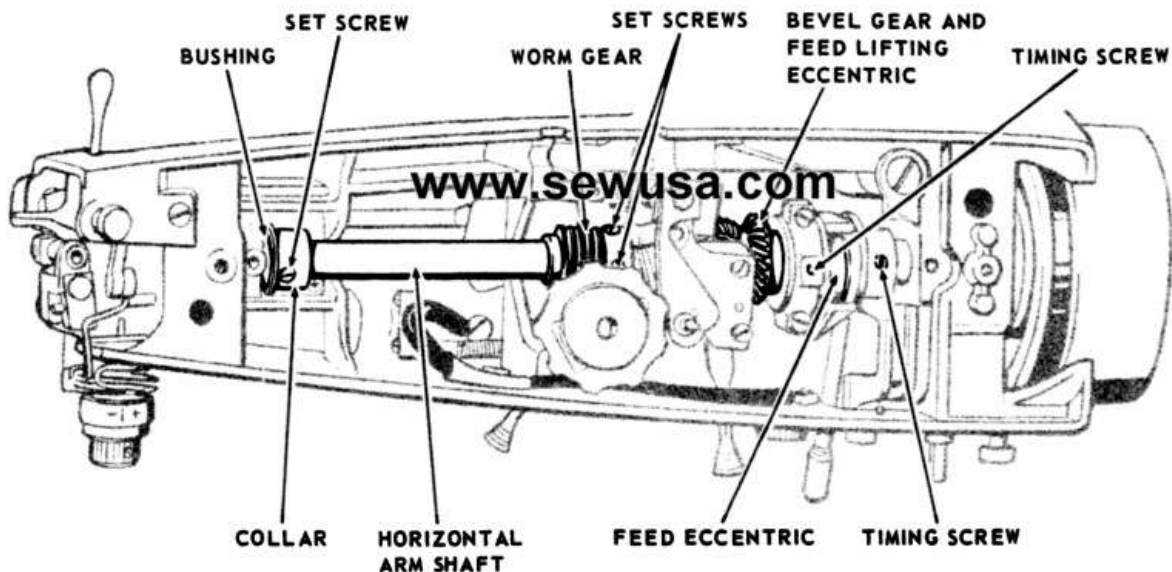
Removal and Replacement of Horizontal Arm Shaft
